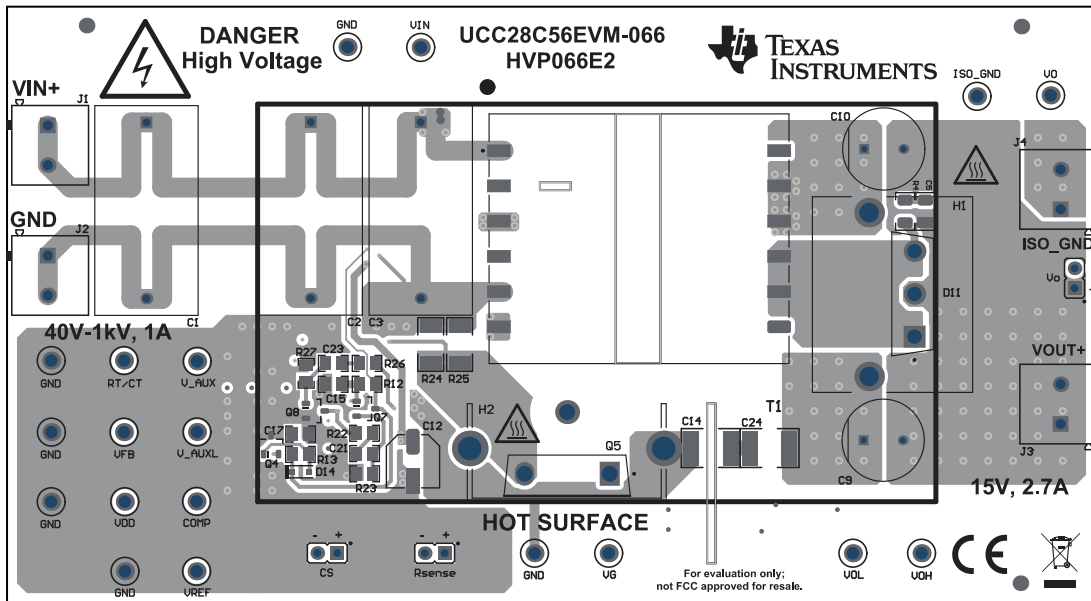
UCC28C56EVM-066, PCB Top Layer, Assembly
